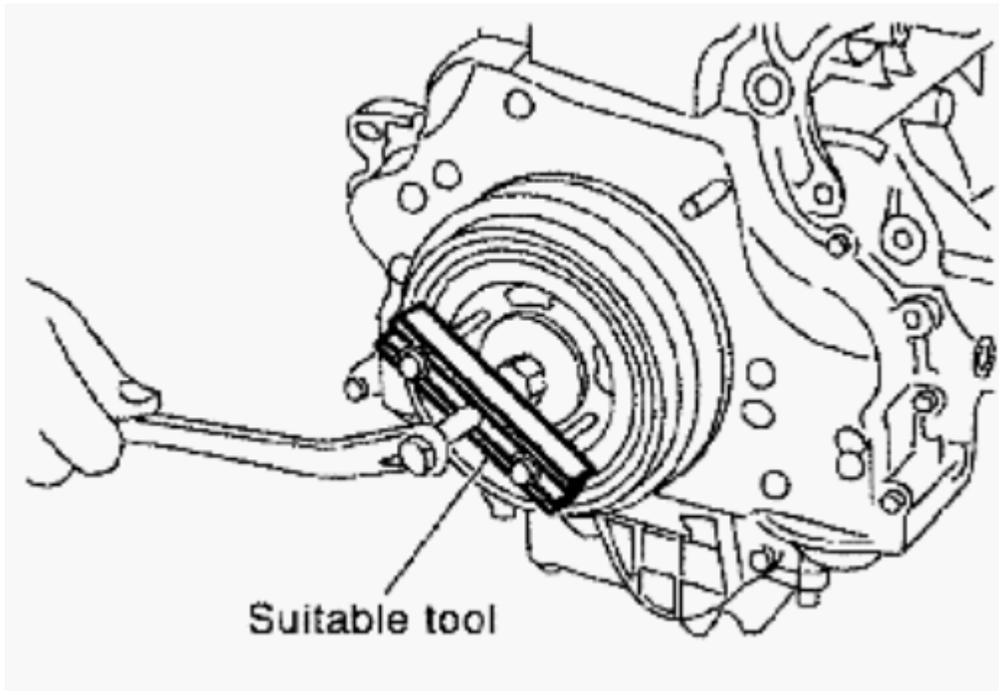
Removing Crankshaft Pulley Using Pulley Puller
